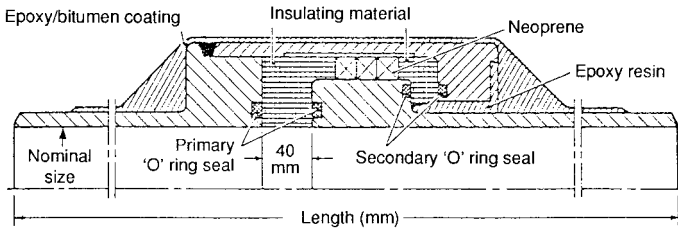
Monobloc insulating coupling ready for erection by welding in. (*Eisenbau Albert Ziefle KG.*)
